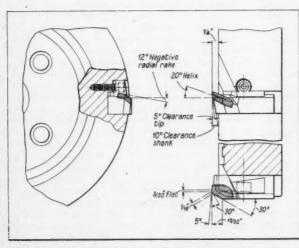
End and side elevations, and a plan view, of the Wimet Lo-Ten cutter blade, mounted in a cutter body. The blade has zero true rake, and is intended for face milling low tensile steels, and parts liable to vibrate under high cutting pressures
